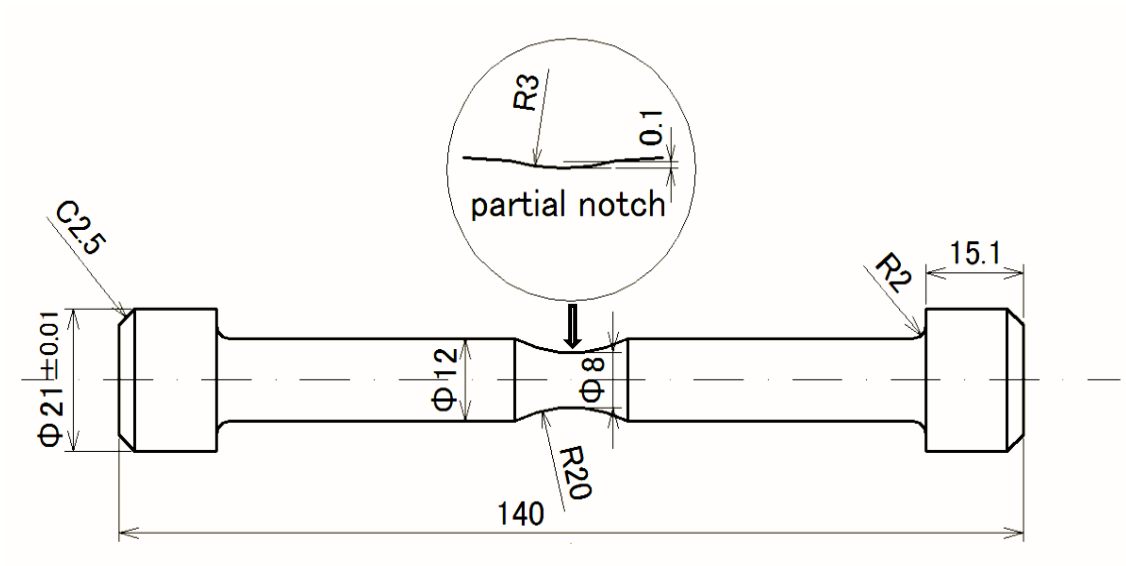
Geometries of specimen for fatigue tests (in mm)
